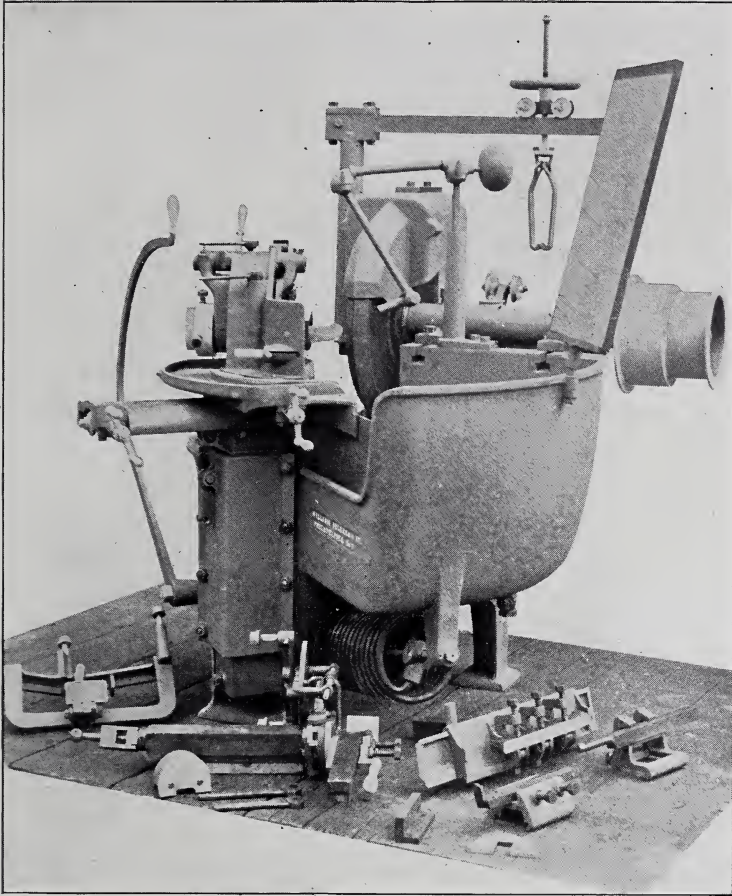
UNIVERSAL TOOL GRINDING MACHINE MADE BY WILLIAM SELLERS & CO., INC., PHILADELPHIA
